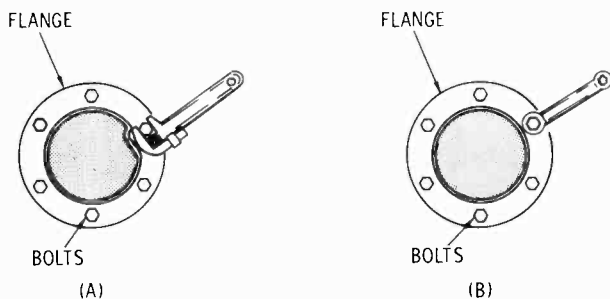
A crescent wrench will dent the line (A); a box wrench will not (B).
